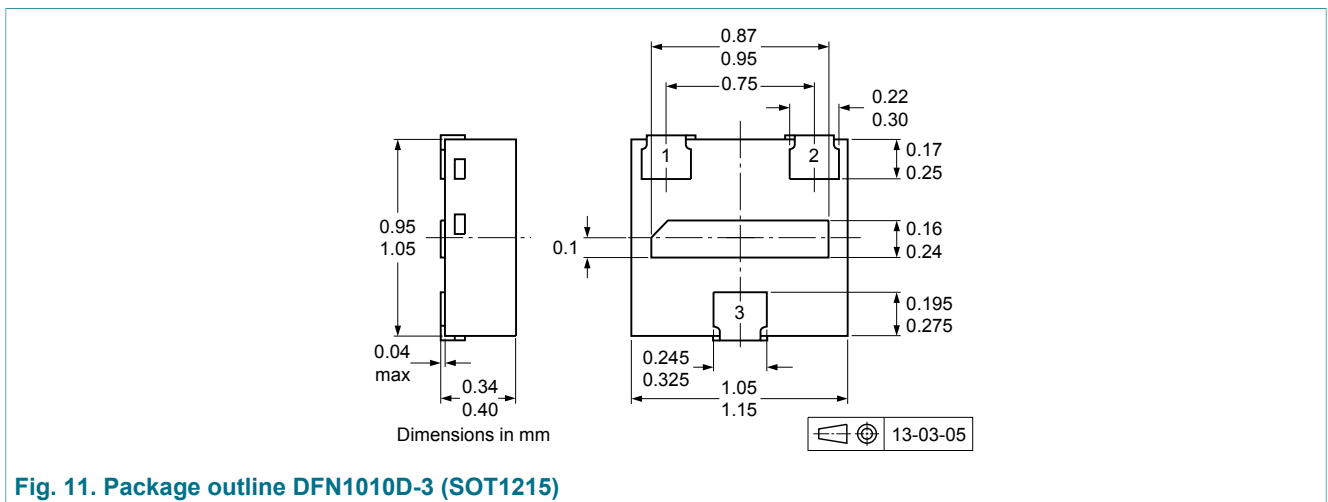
Package outline DFN1010D-3 (SOT1215)
